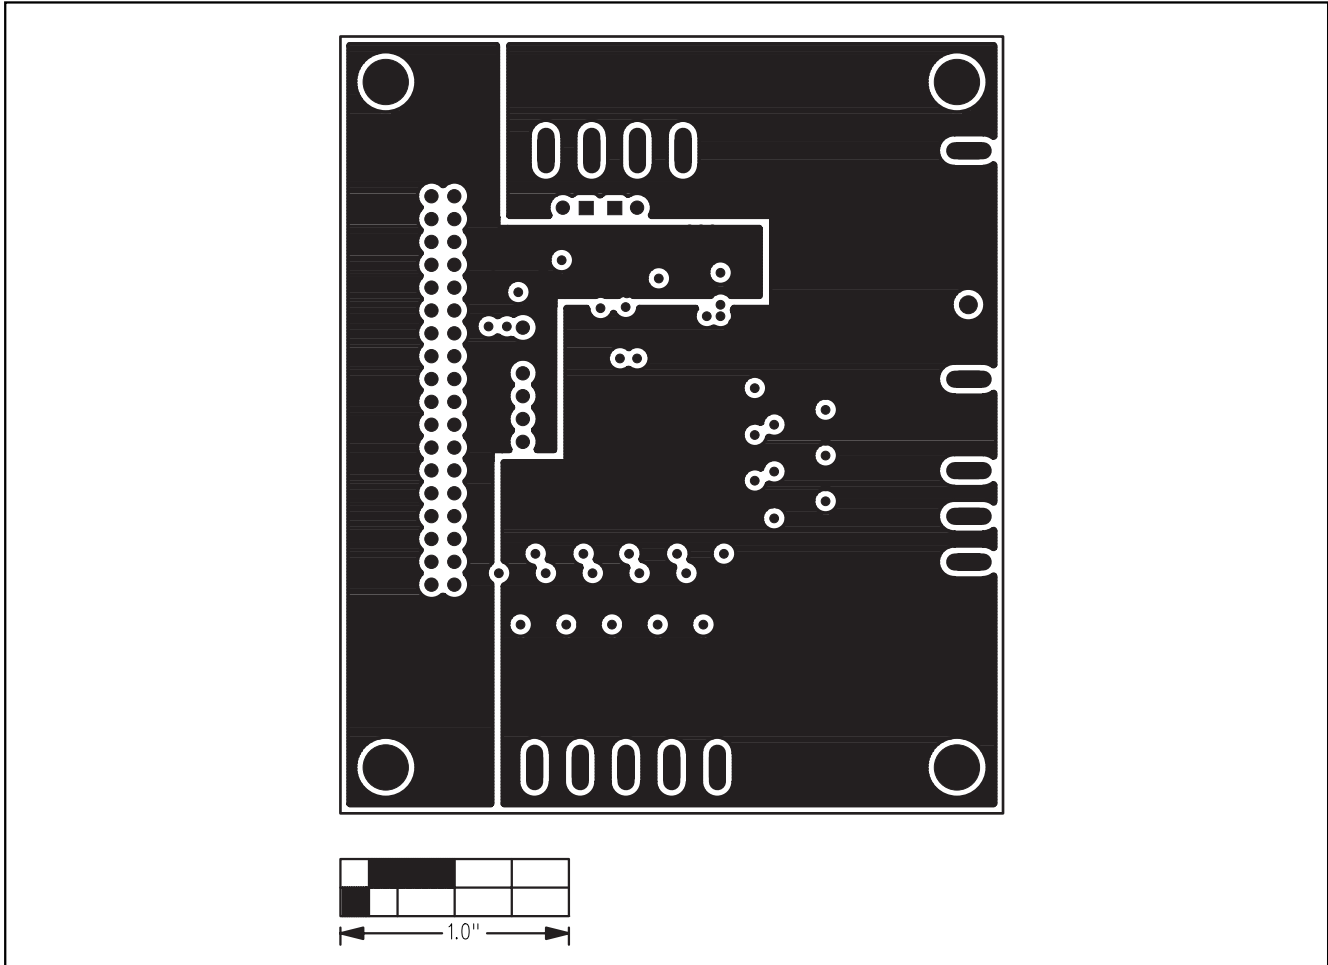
MAX1168 EV Kit PC Board Layout—Inner Layer 2 (GND)
